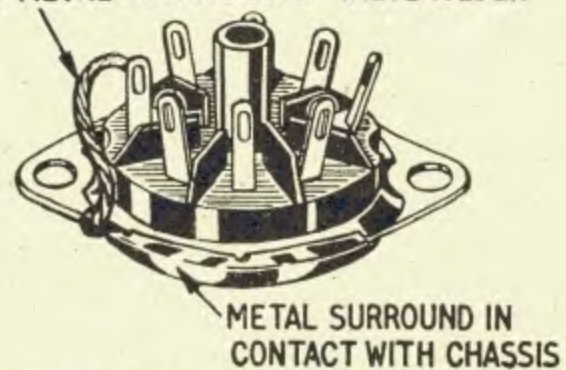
Earthing tag on the valveholder is connected to the metal surround by soldering. Alternatively the earthing wire can be clamped under the fixing nut as shown in Fig. 3
